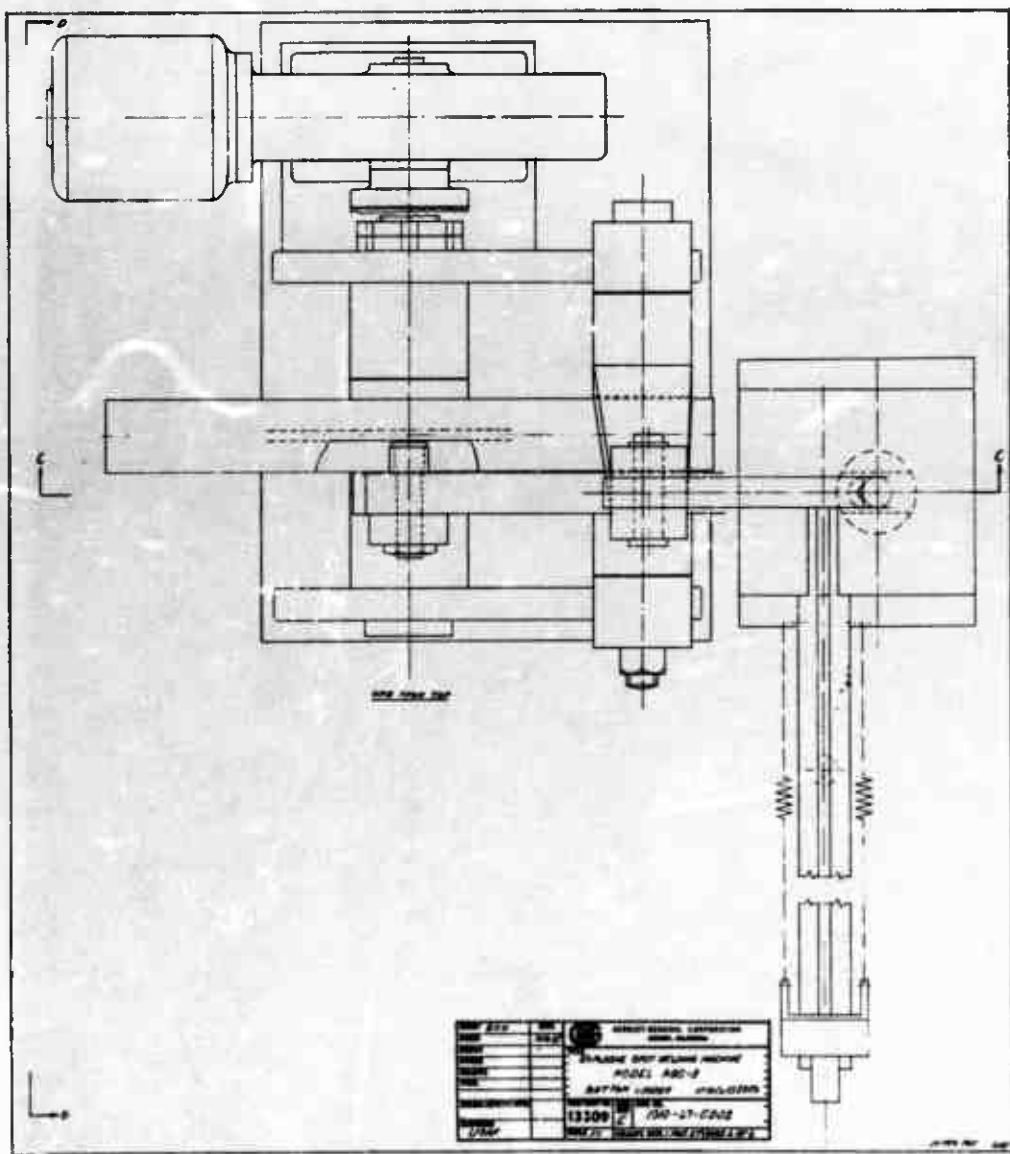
Model AGC-2 Explosive Spot Welding Machine (Sheet 4 of 4).
